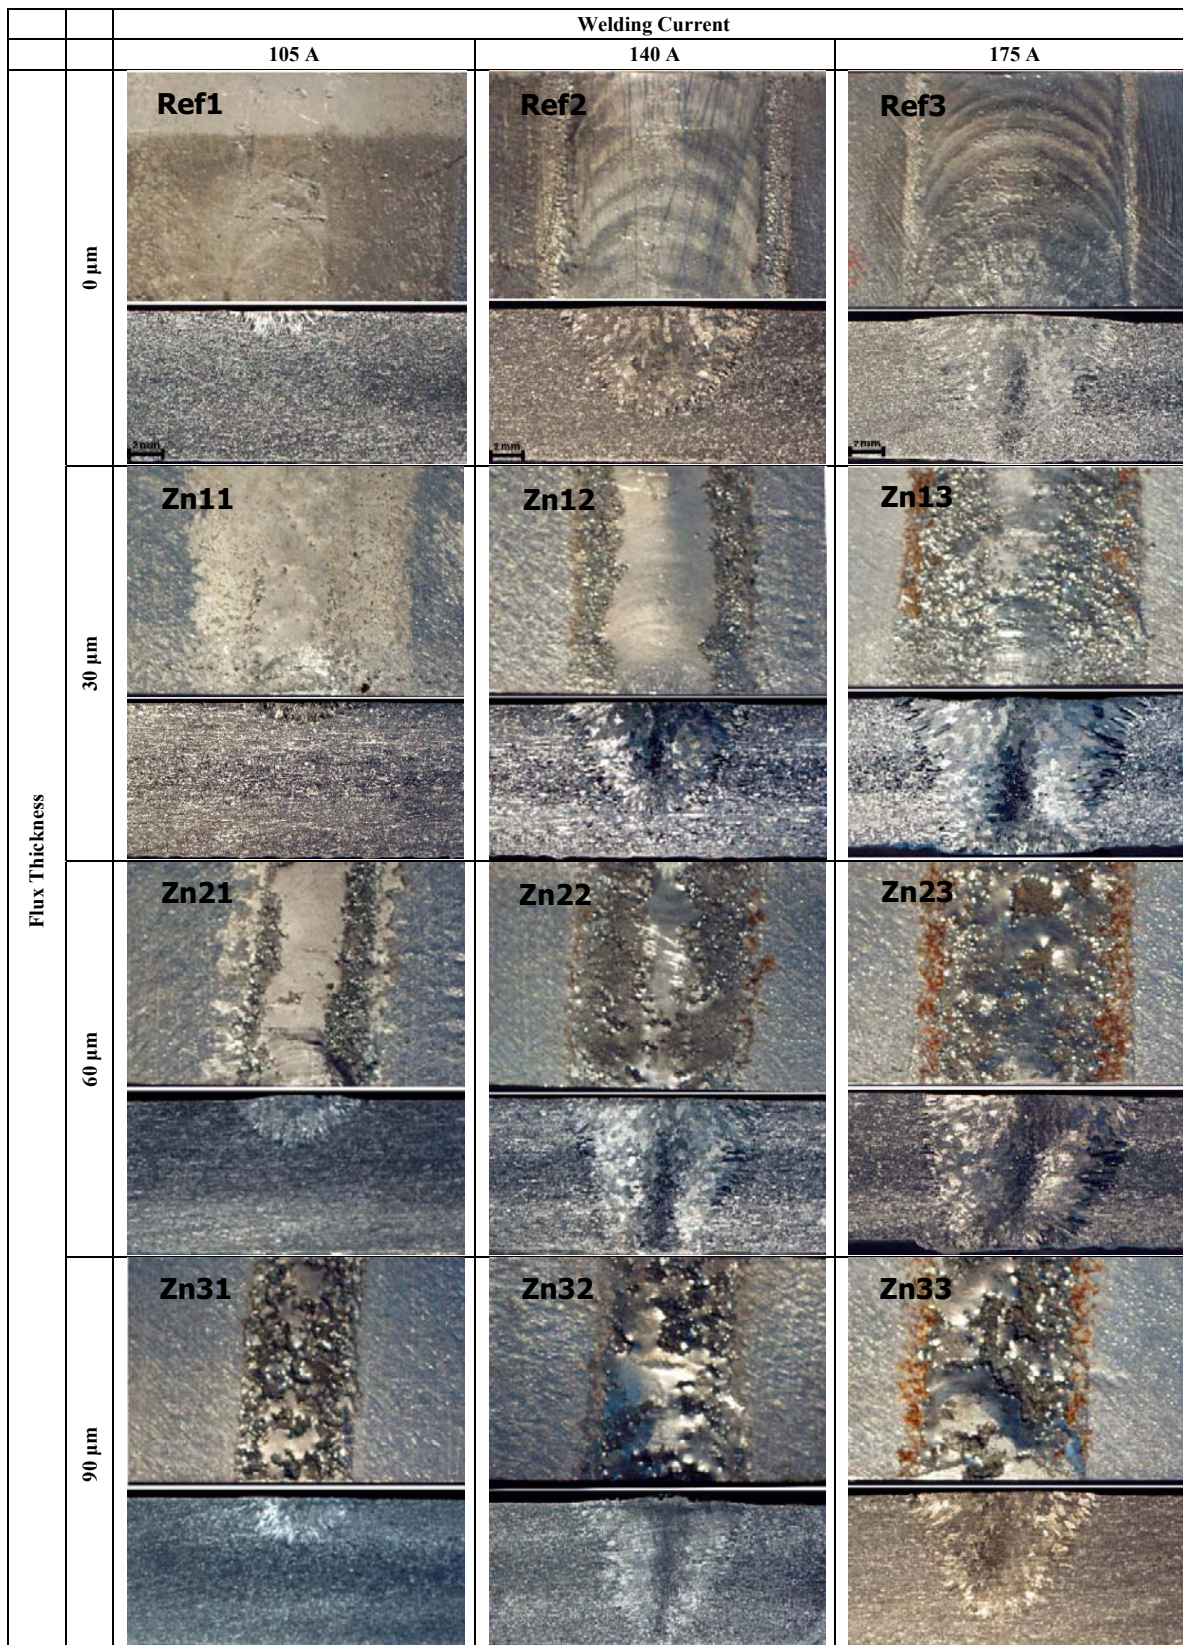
Surface and cross sections of the welds after macro etching
